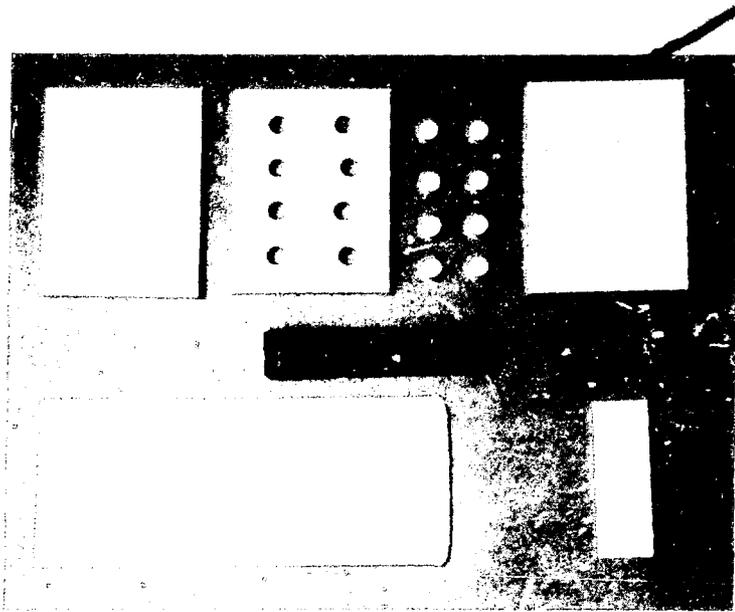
Compatibility Study Components before Assembly (Top), after Rolling and Partial Shearing (Lower, Left), and Finished Plate (Bottom, Right).
